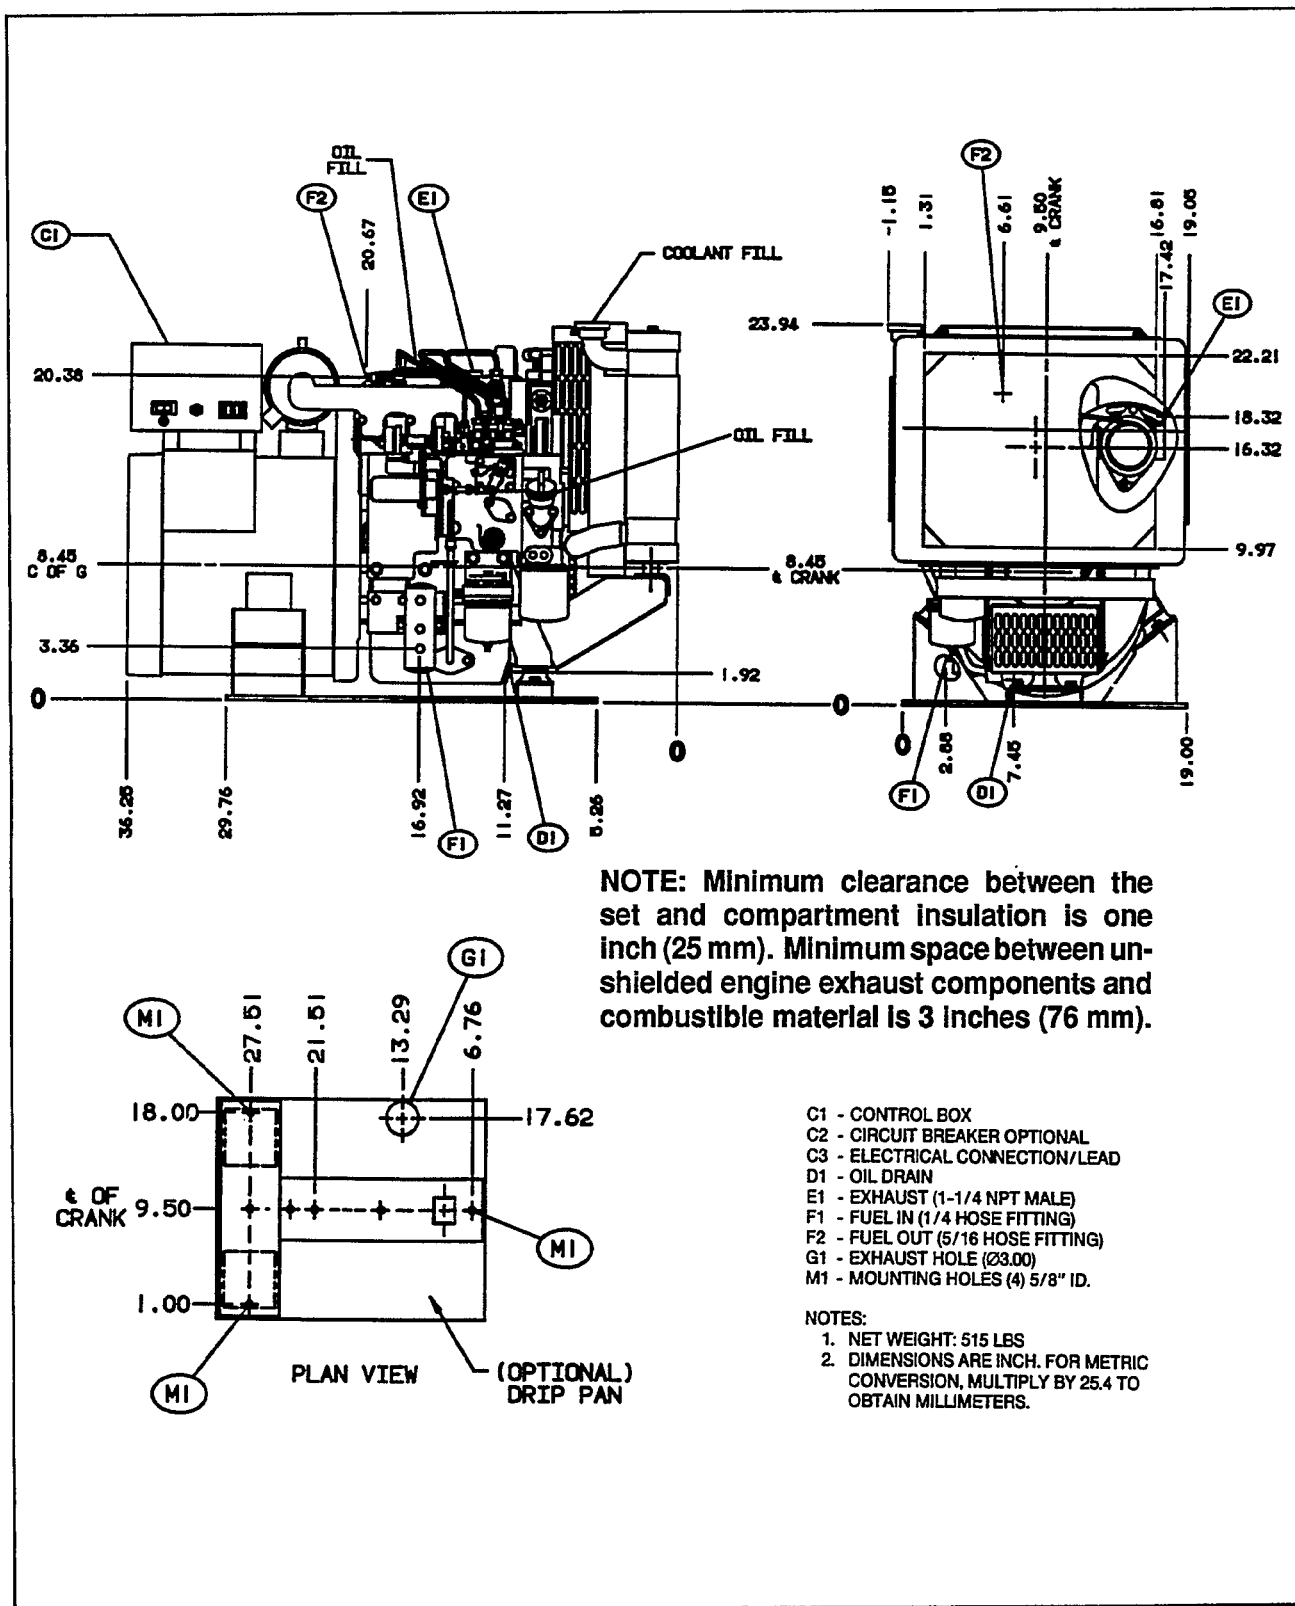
7.5 DKD, 6.5 DKD AND 6.0 DKD DRIP PAN AND GENERATOR SET MOUNTING DIMENSIONS
